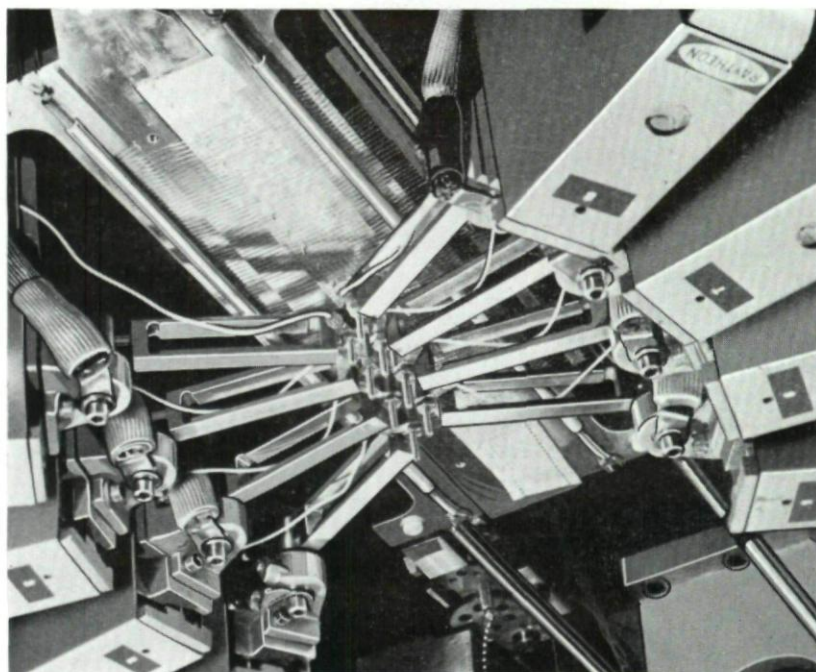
Automatic fabrication of welded matrix
